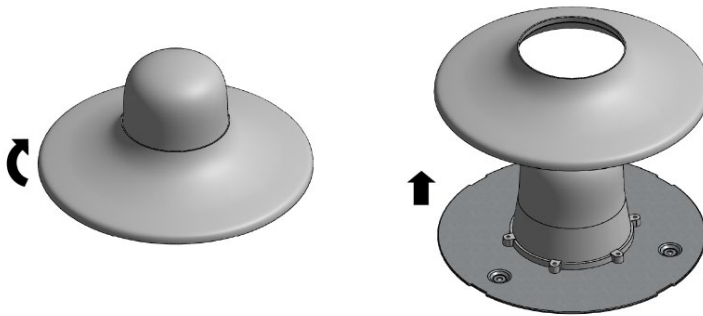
Rotate and valance counter clockwise and lift off to remove and access mounting holes
